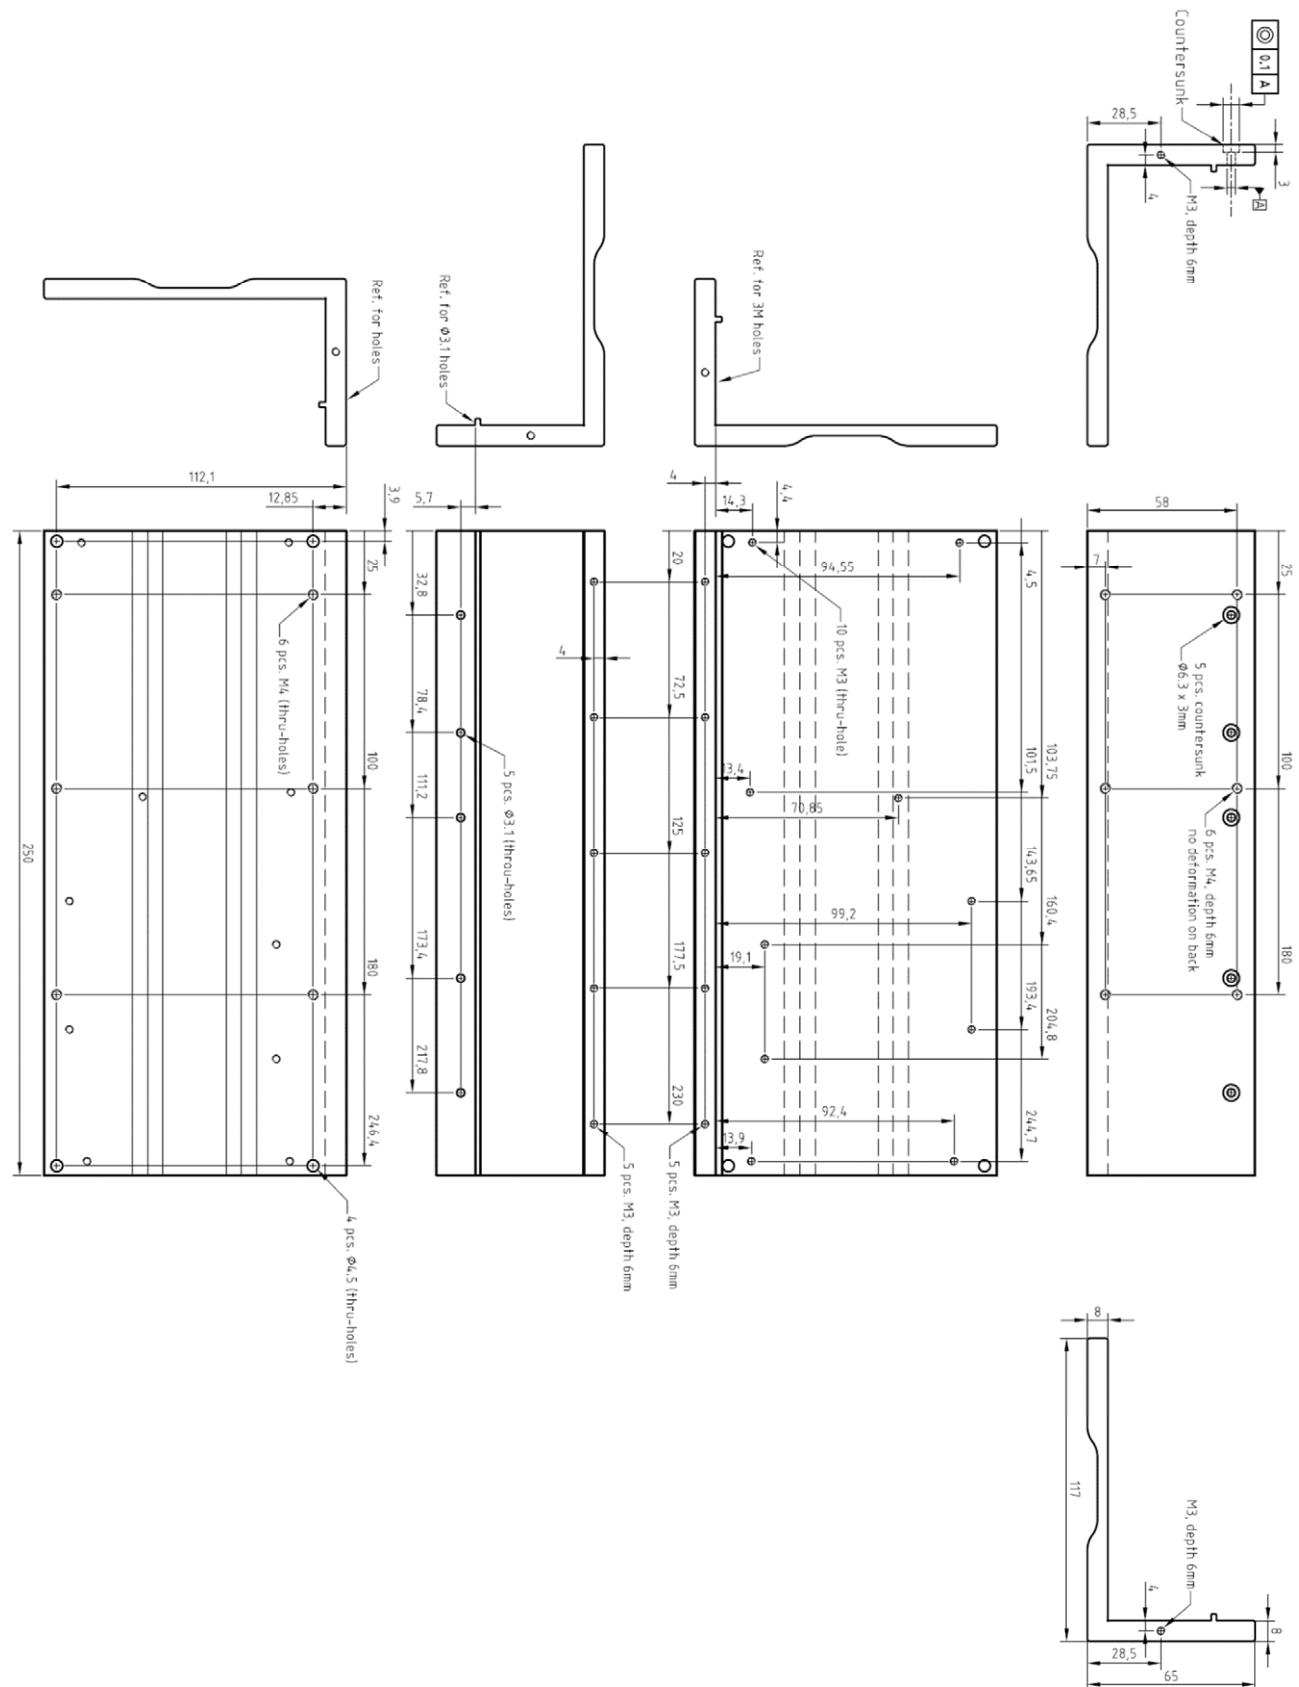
Mechanical dimensions for M-PRO2 heat sink - All dimensions in mm
